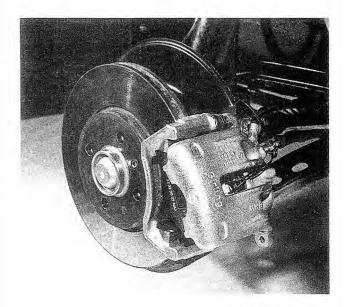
Brake caliper being pivoted into position on pad carrier over brake pads.
